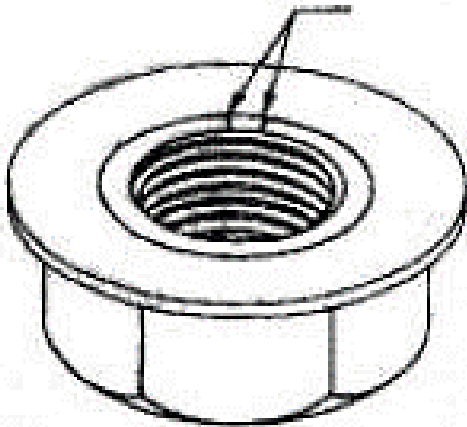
Cracks in the washer seat of the nut-washer assembly.
